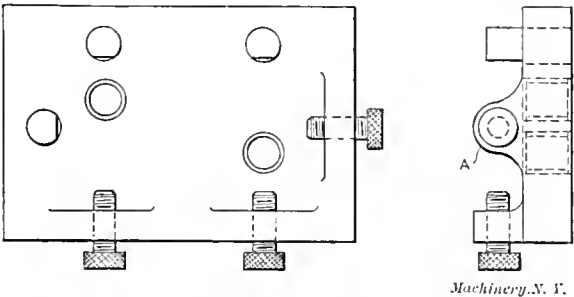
Second Improvement: Locating Screws Holding Work in Place.
